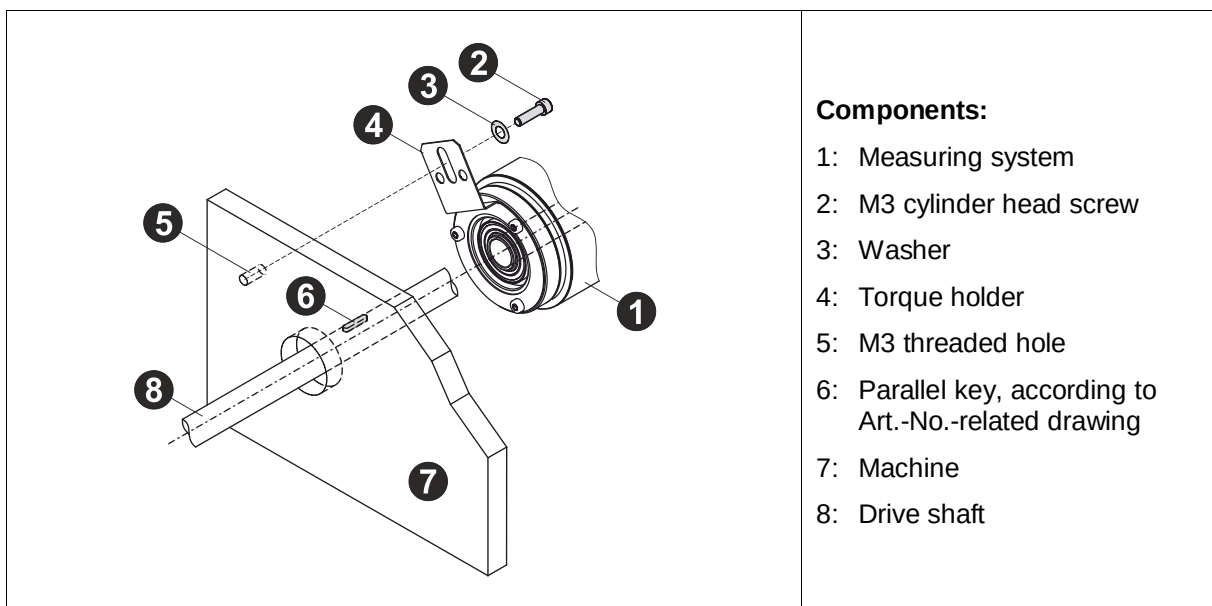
Mounting with torque holder (Spring metal sheet with one wing), principle illustration
